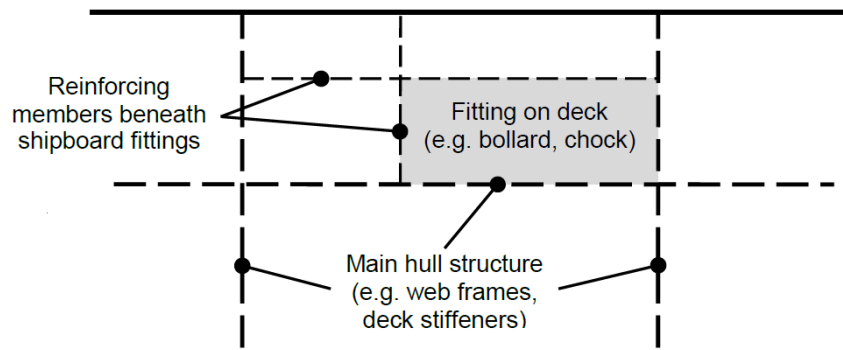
Sample arrangement of reinforced members beneath shipboard fittings
